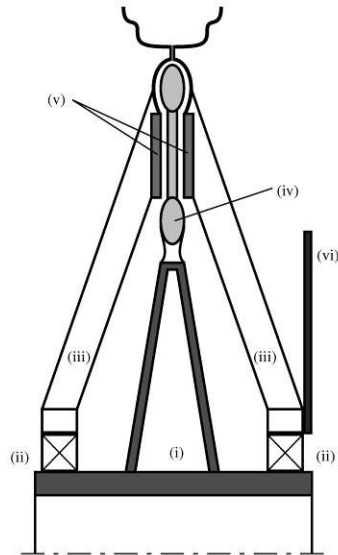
Cross section of in-wheel hub motor: (i) light metal hub, (ii) bearings, (iii) two symmetric CFRP half rims, (iv) air cored winding with GRP connection to the hub, (v) two Halbach magnet array rings, (vi) brake disk
